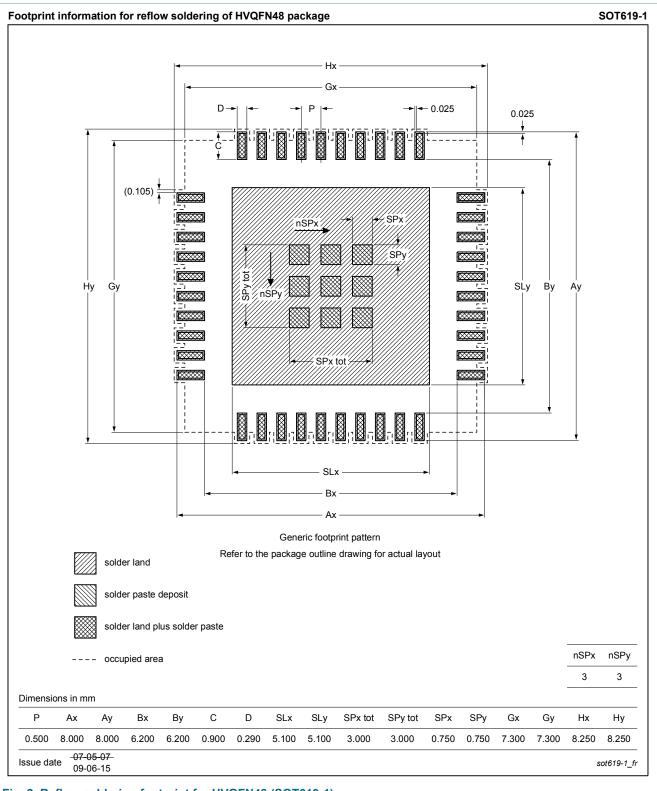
Reflow soldering footprint for HVQFN48 (SOT619-1)
